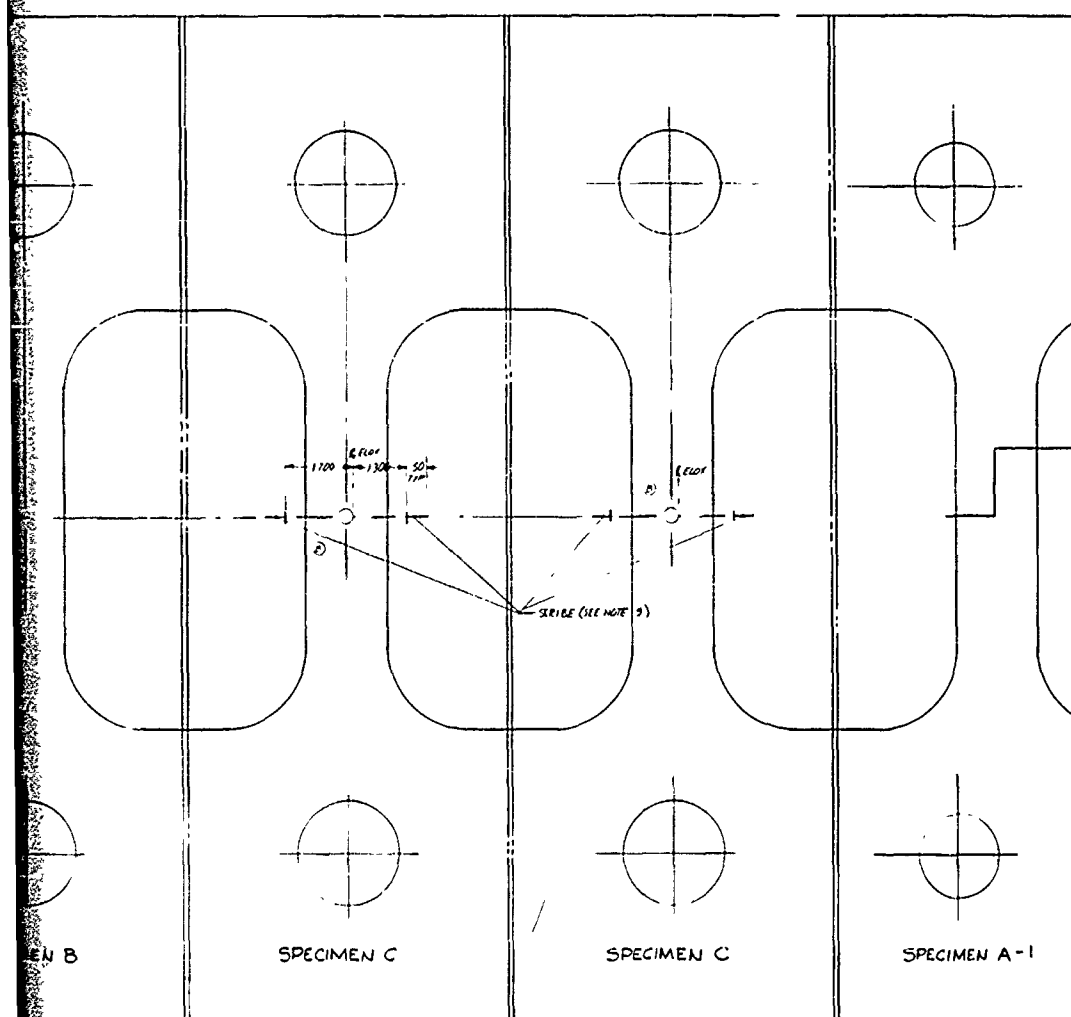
TEST SPECIMEN - DAMAGE TOLERANCE.
